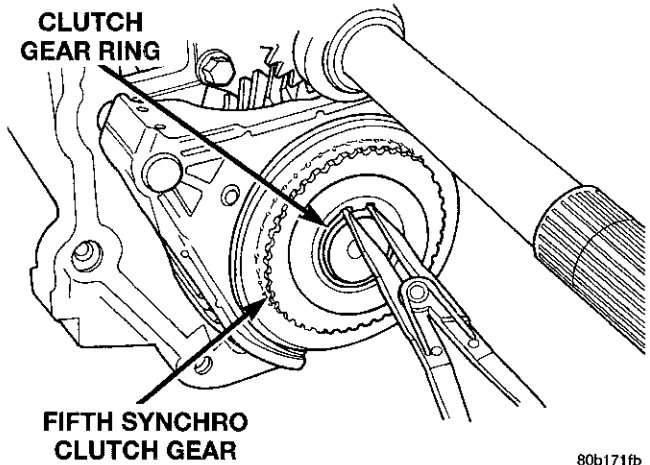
Removing Countershaft Fifth Gear Clutch Gear Snap Ring
